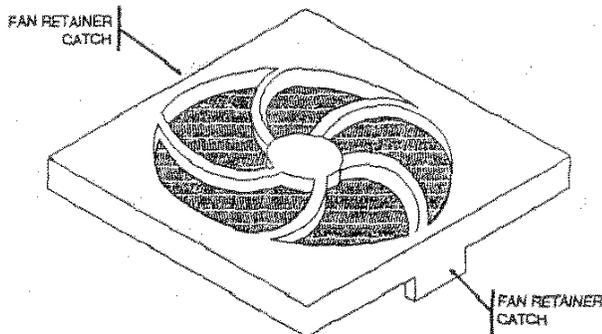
FAN FILTER RETAINER REMOVAL.
